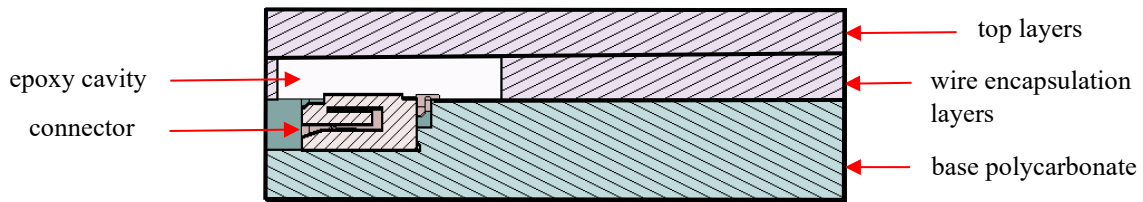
Cross-sectional view of coupon highlighting printing sequences: 1) base polycarbonate, 2) wire encapsulation layers, and 3) top layers.
